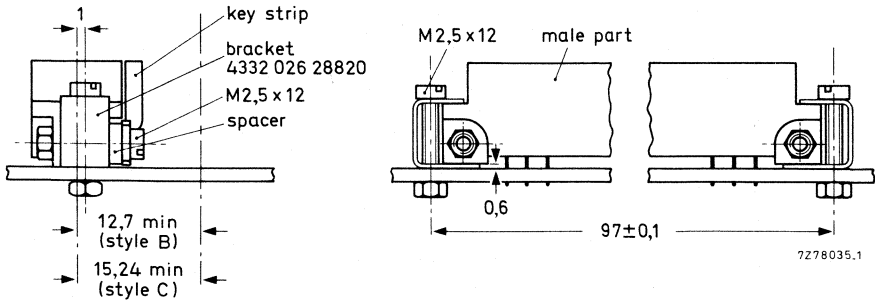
Key strip mounted to a male part with straight dip-solder pins.
